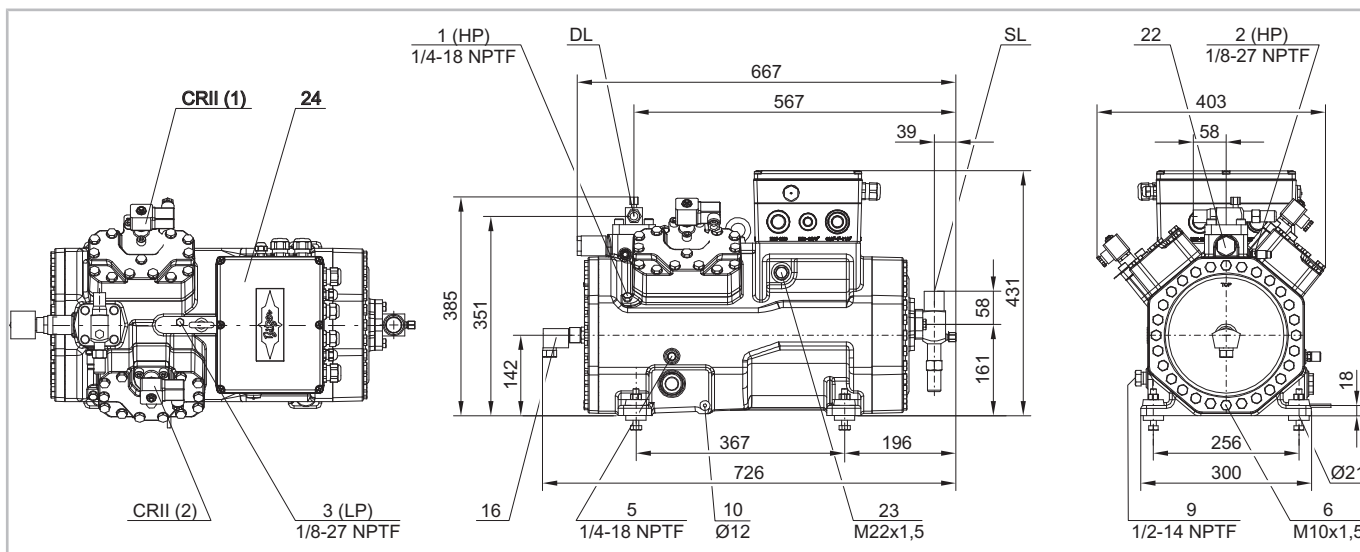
Dimensional drawing 4JTEU-10LK .. 4FTEU-20LK
